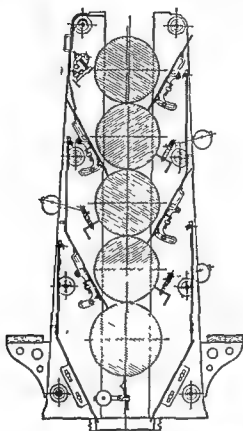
Five-high crushing rolls, cross section (Courtesy *The French Oil Mill Machinery Co*)
